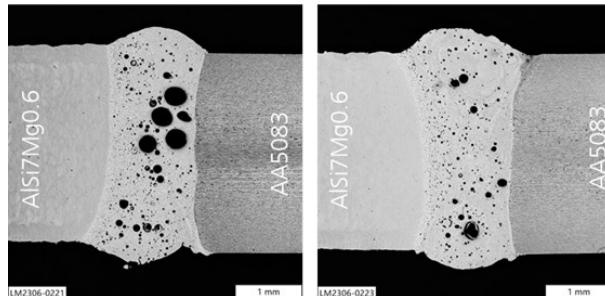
Butt-joints of AlSi7Mg0.6 and EN AW-5083
